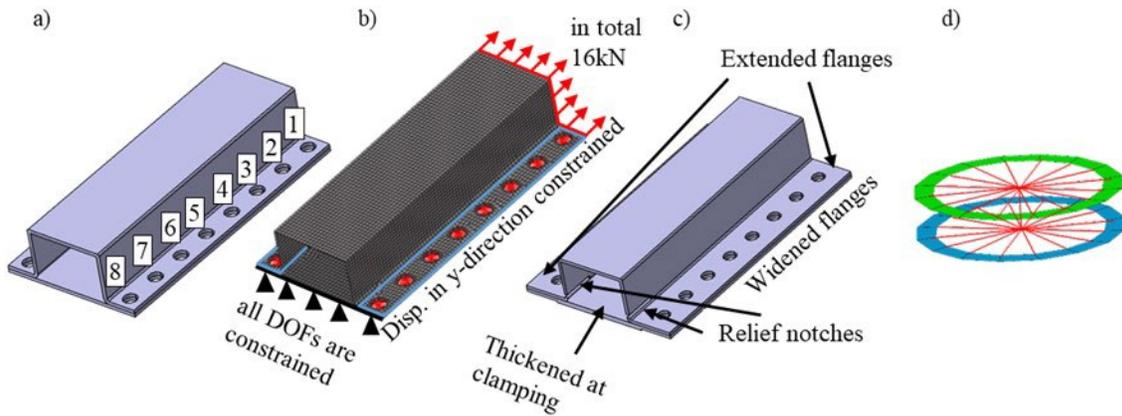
a) Initial product design b) Load case the given joining task c) Final product design after improvements d) Beam-rigid-spider element
